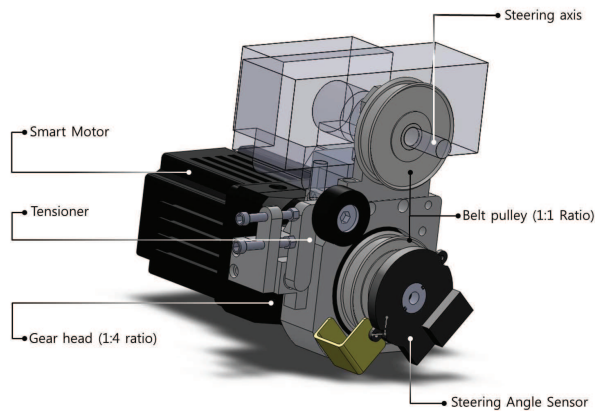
Assembled 3D CAD model of the steering actuation mechanism
